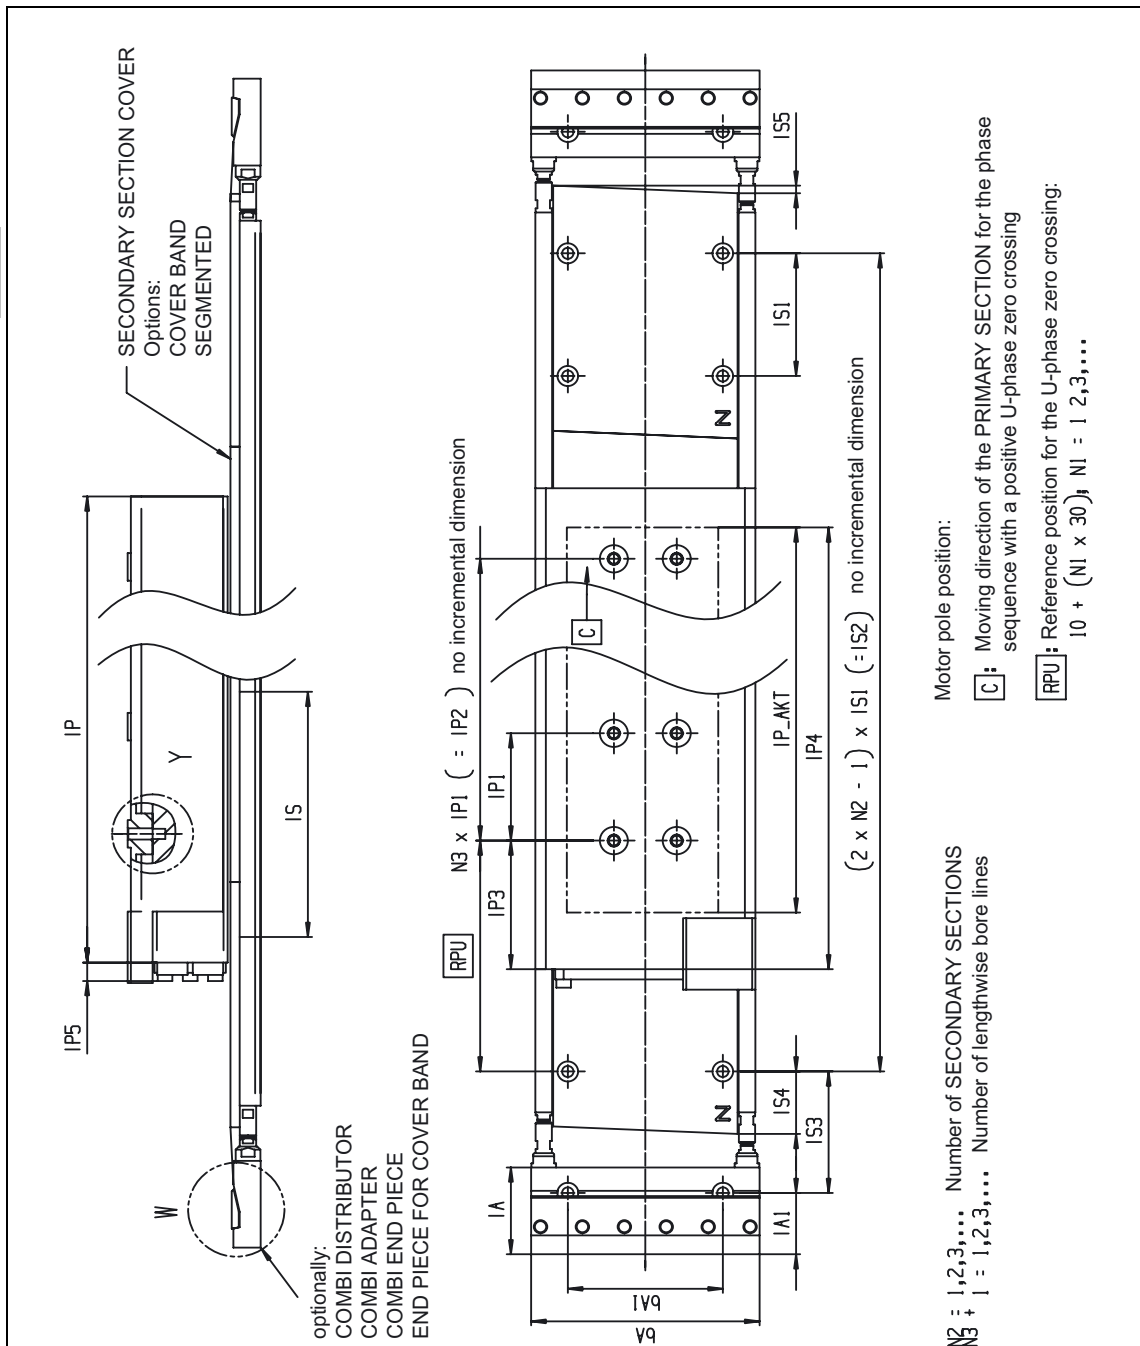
Mounting dimensions for the 1FN3050, 1FN3100 and 1FN3150 motor models
